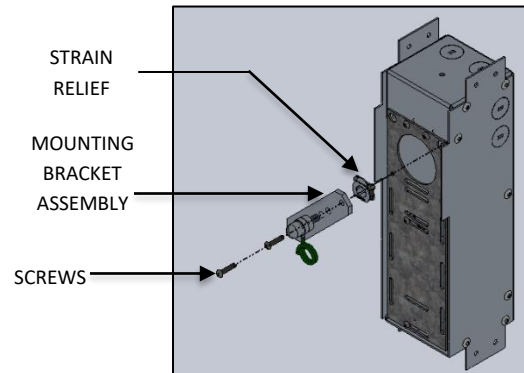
MOUNTING BRACKET DISASSEMBLY
